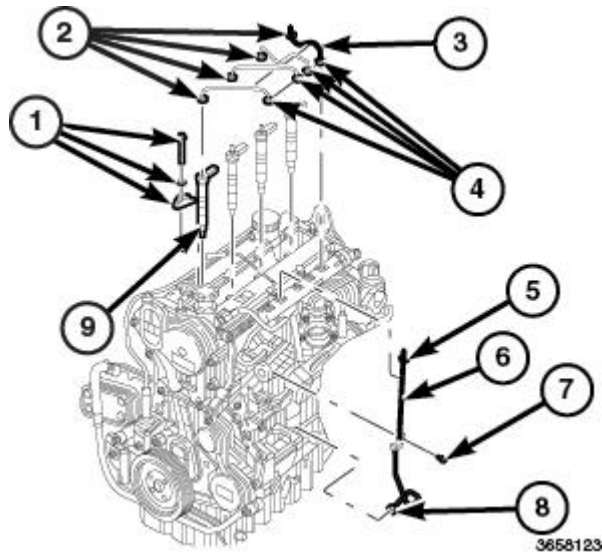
Fuel Injectors, Fuel Tubes & Fasteners
